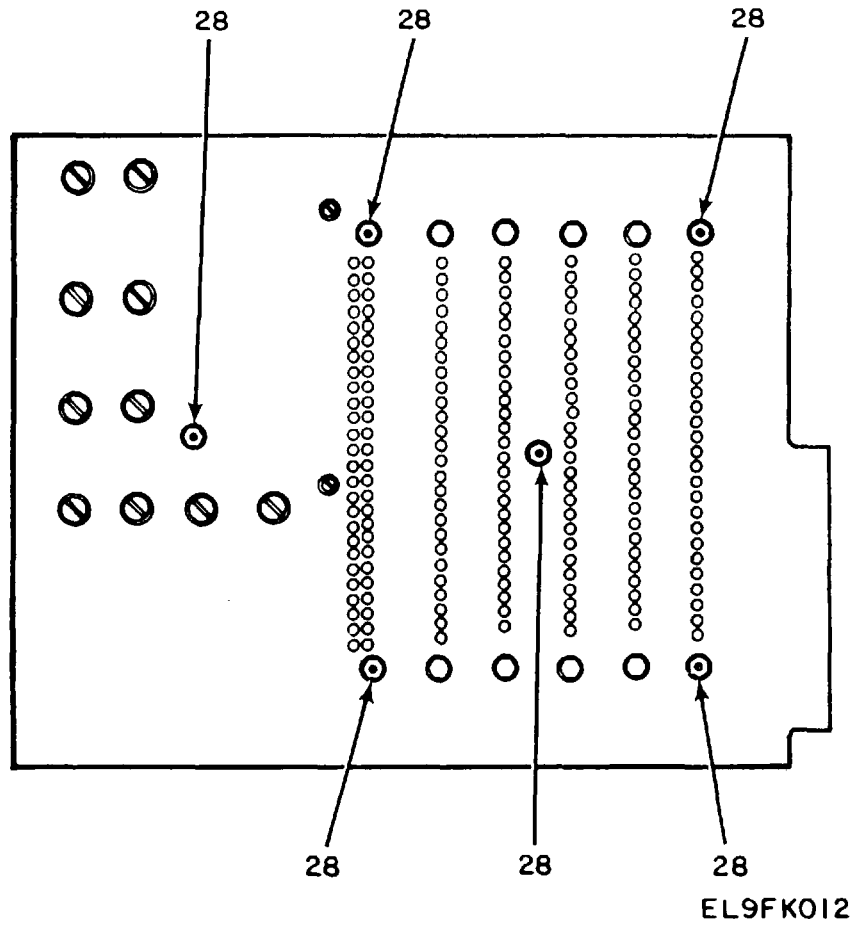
CIRCUIT CARD ASSEMBLY, MASTER (A6), (SHEET 3 of 4)
